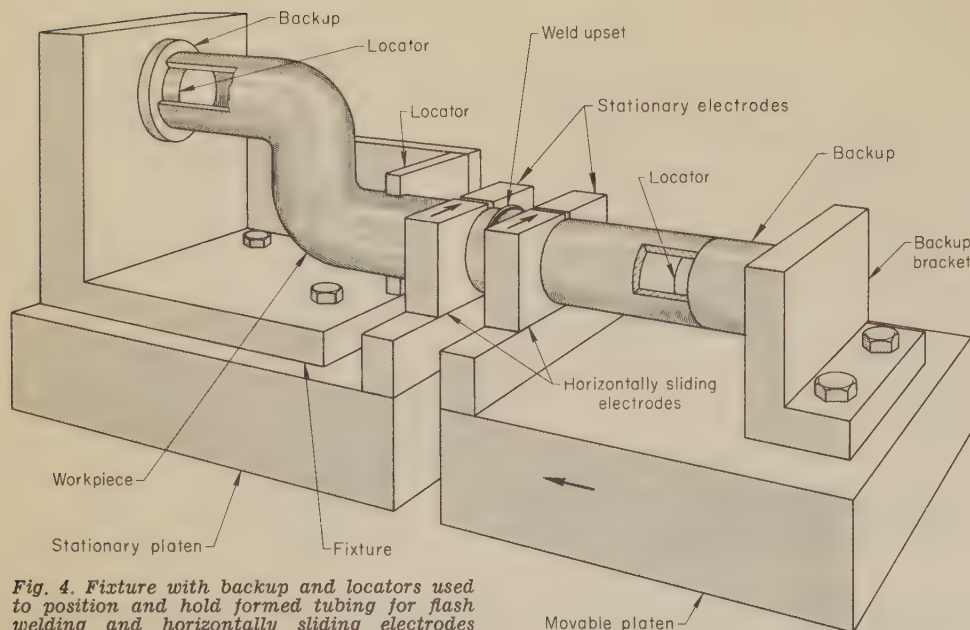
Fixture with backup and locators used to position and hold formed tubing for flash welding and horizontally sliding electrodes
